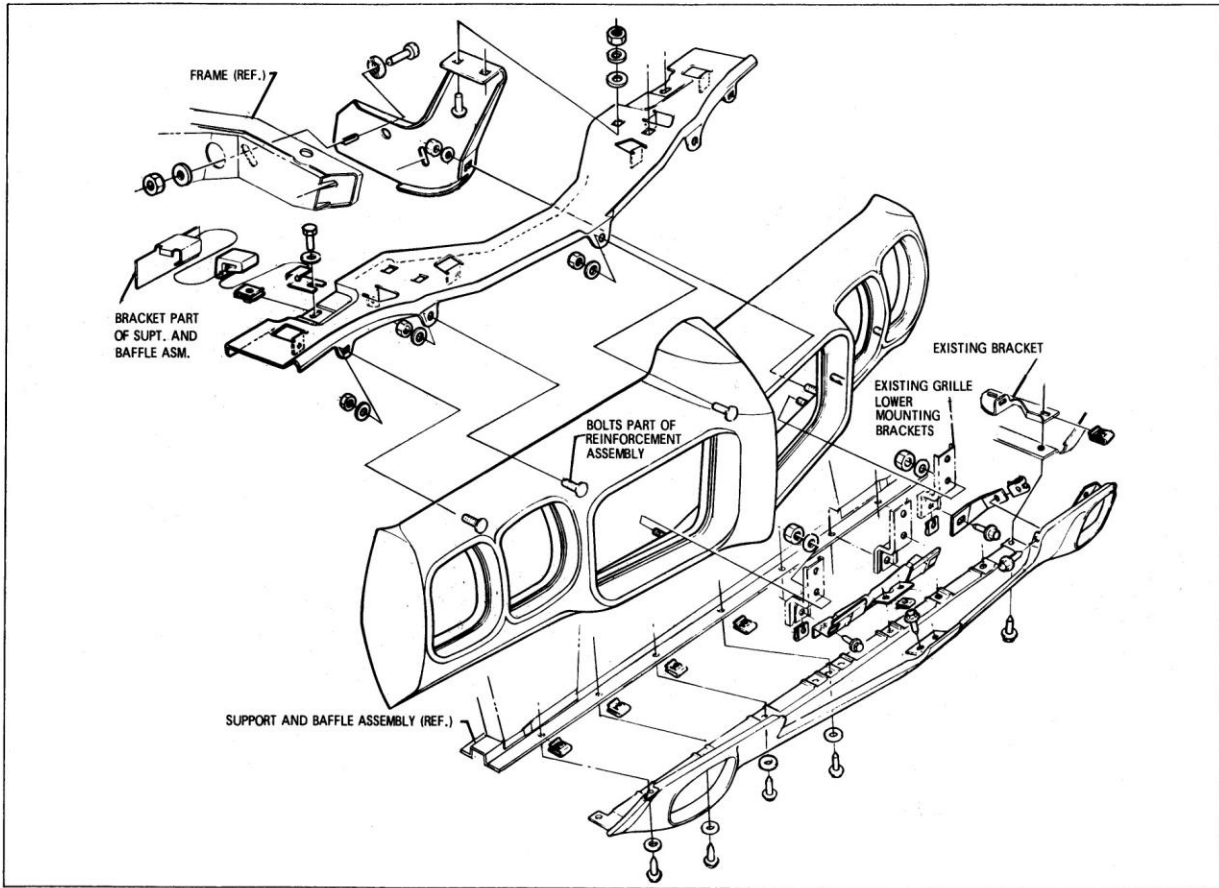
G.T.O. Front Bumper and Valance Panel
